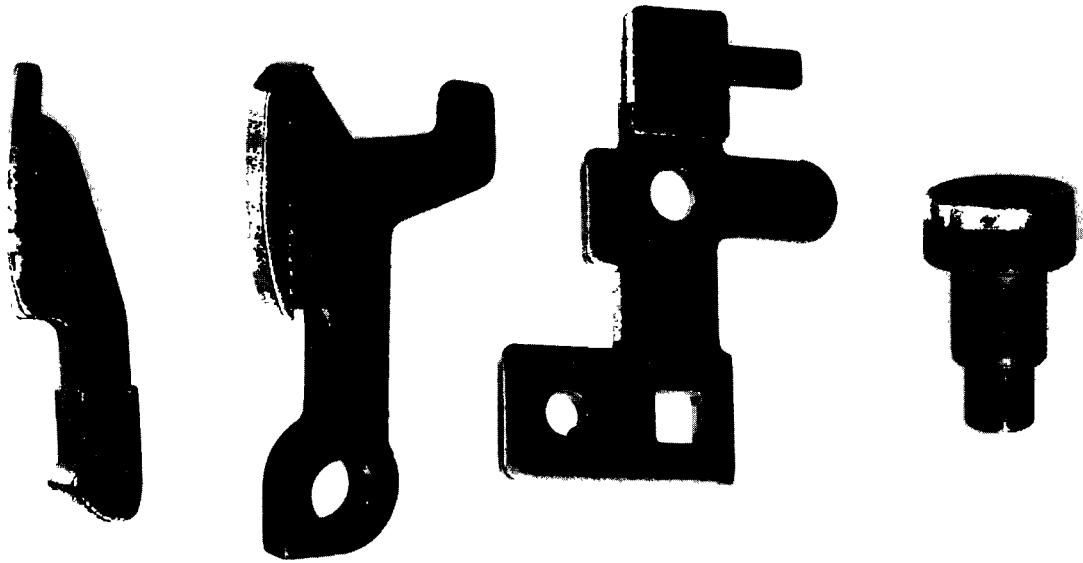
Typical Electrical Contacts Joined by Magnetic Force Percussion Welding
